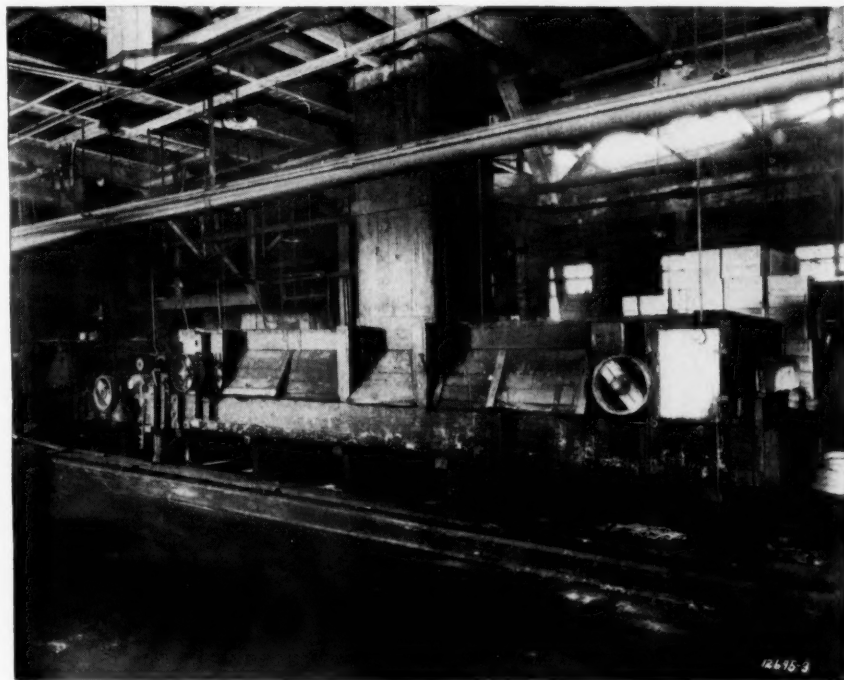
Continuous strip pickling tanks with wooden hood and ducts to collect acid fumes.
